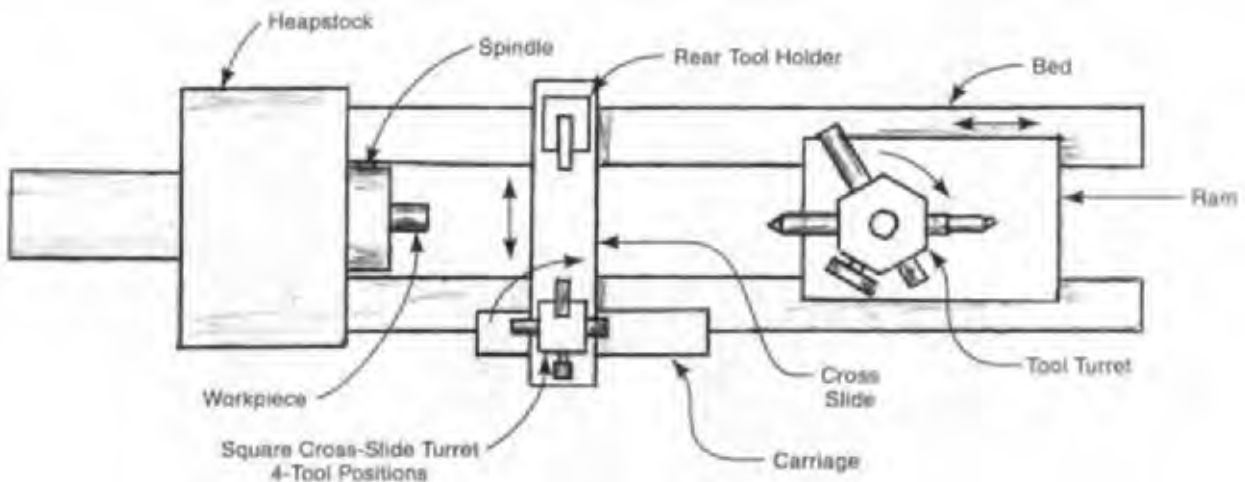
A2b Overhead view of a ram-type turret lathe. The turret on the ram holds up to 6 cutting tools. Four tools can also be held in the turret on the cross slide and an additional one on the rear tool holder.
